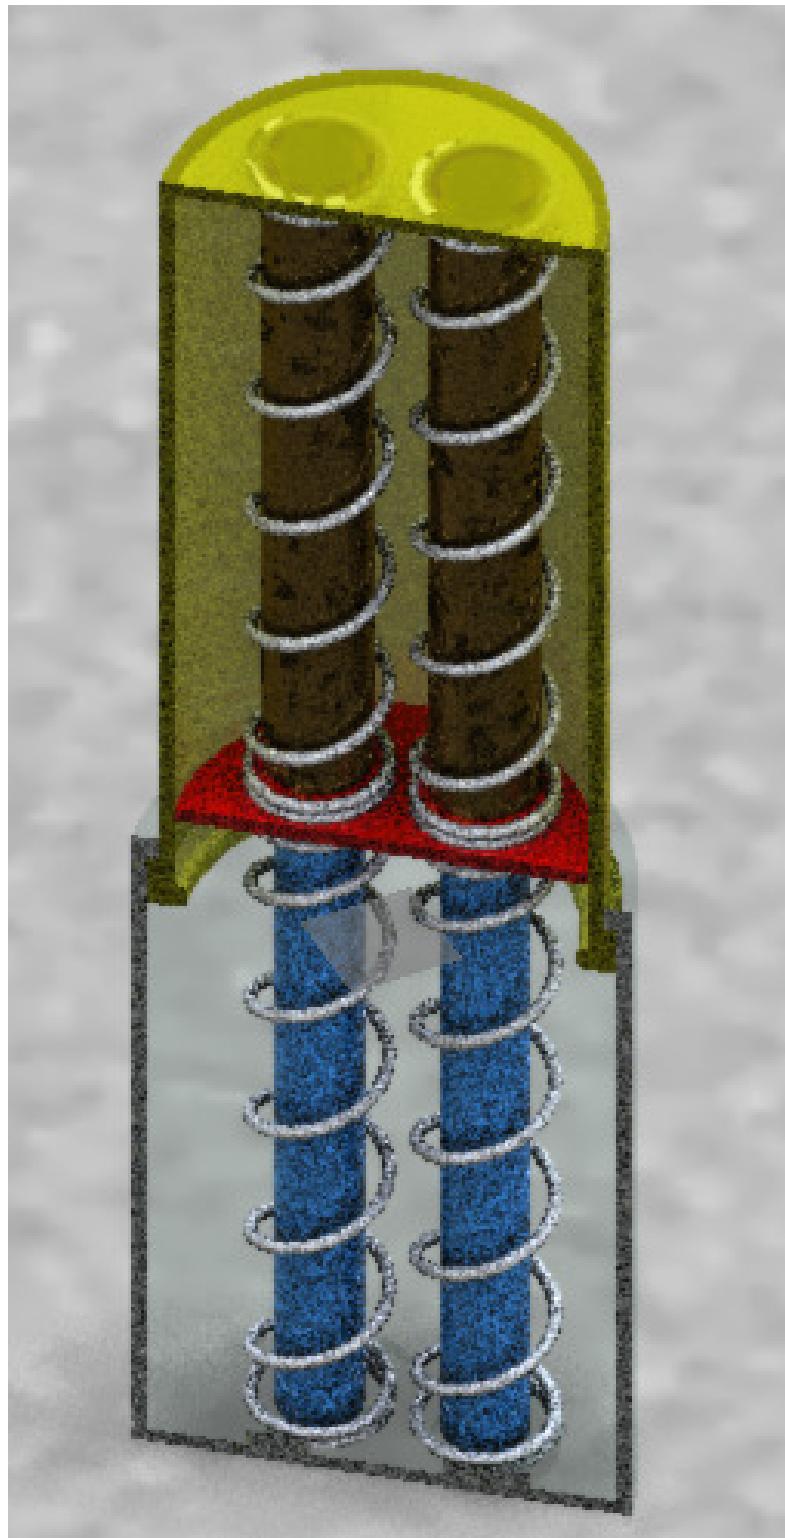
Ni-Ti Shock Absorber Assembly Section View
